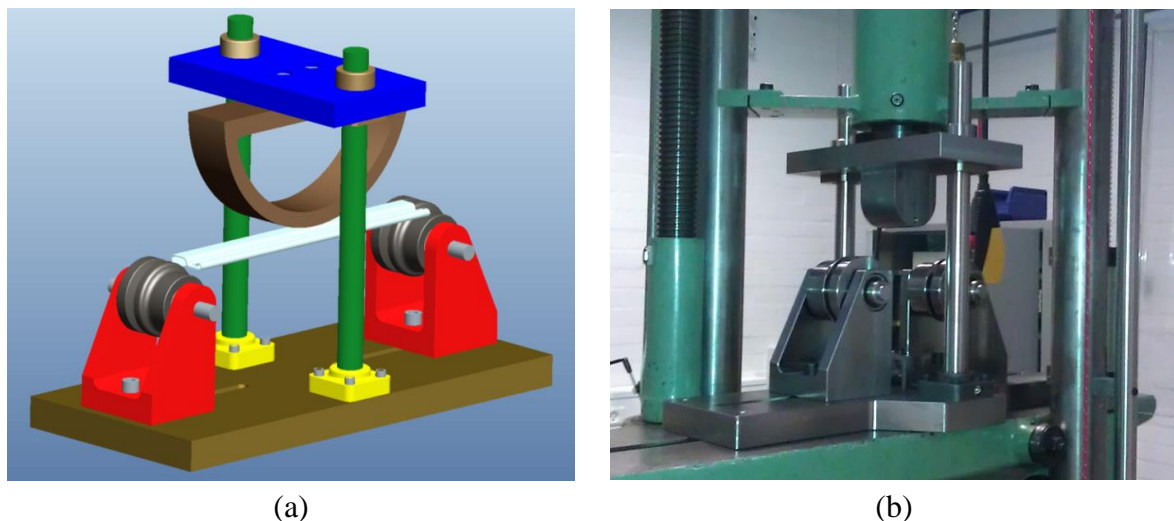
Simulative three-point-bend test for winding simulation; (a) CAD model and (b) equipment mounted in the Mohr Federhaff press at DTU-MEK
